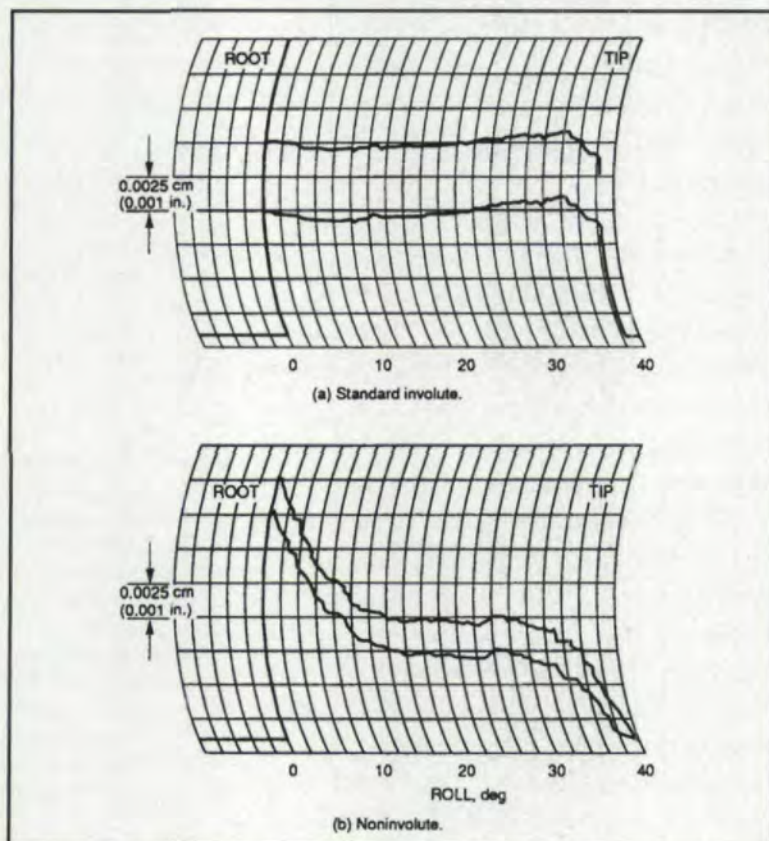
Tooth profile traces of standard involute and noninvolute gears.
